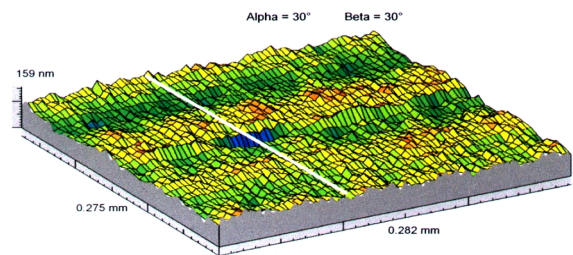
Picture of not very deep and discontinuous scratch on a surface of Weller endoprosthesis head at the pointed place of intersection
